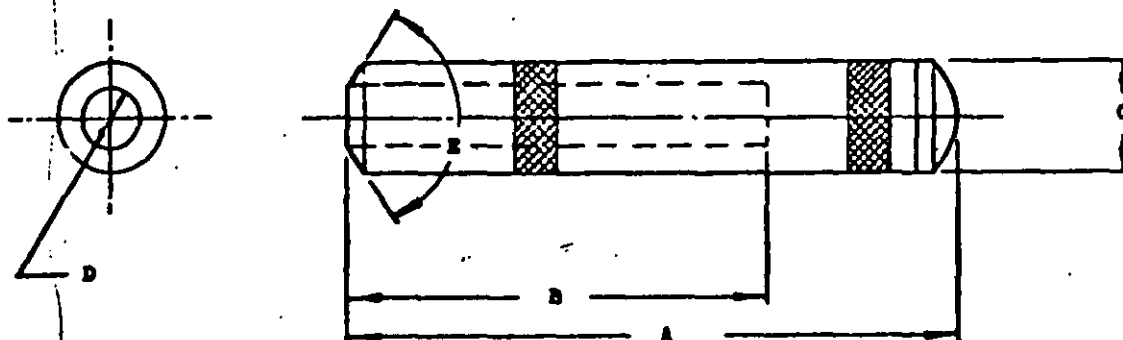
Type III, class 5, staking tools, spark plug inserts.
